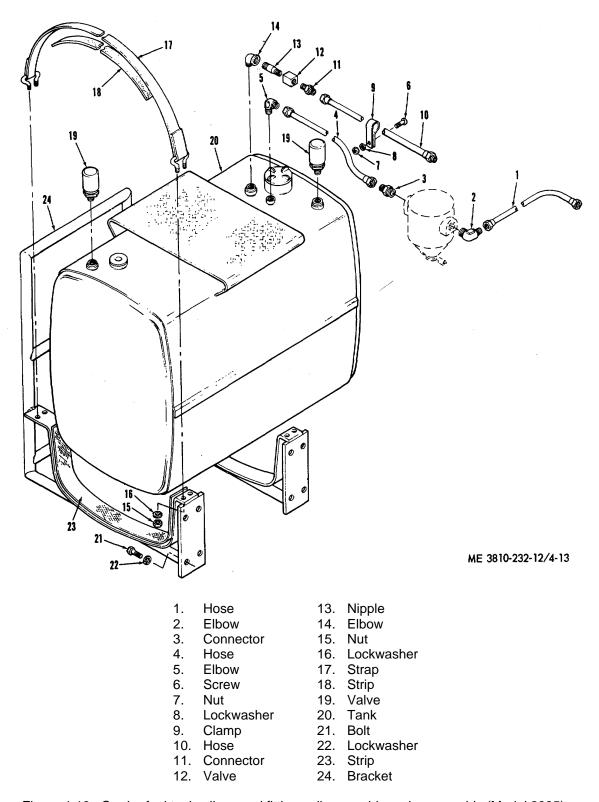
Carrier fuel tanks, lines and fittings, disassembly and reassembly (Model 2385).
